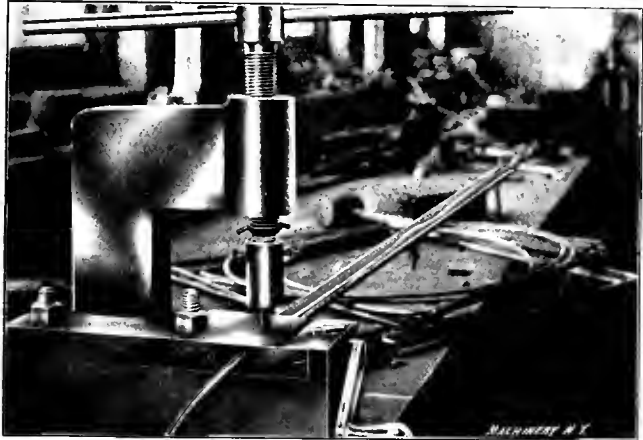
Press for Cutting Dome and Steam-heat Gasket Wire
